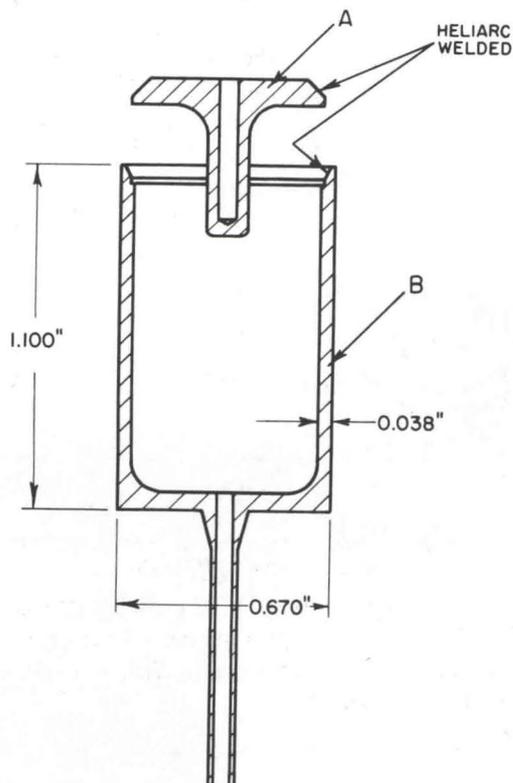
Capsule for 1-in. furnace assembly equipped with thermocouple well: A - Base with thermocouple well; B - body of capsule with filling tube, grade A nickel
